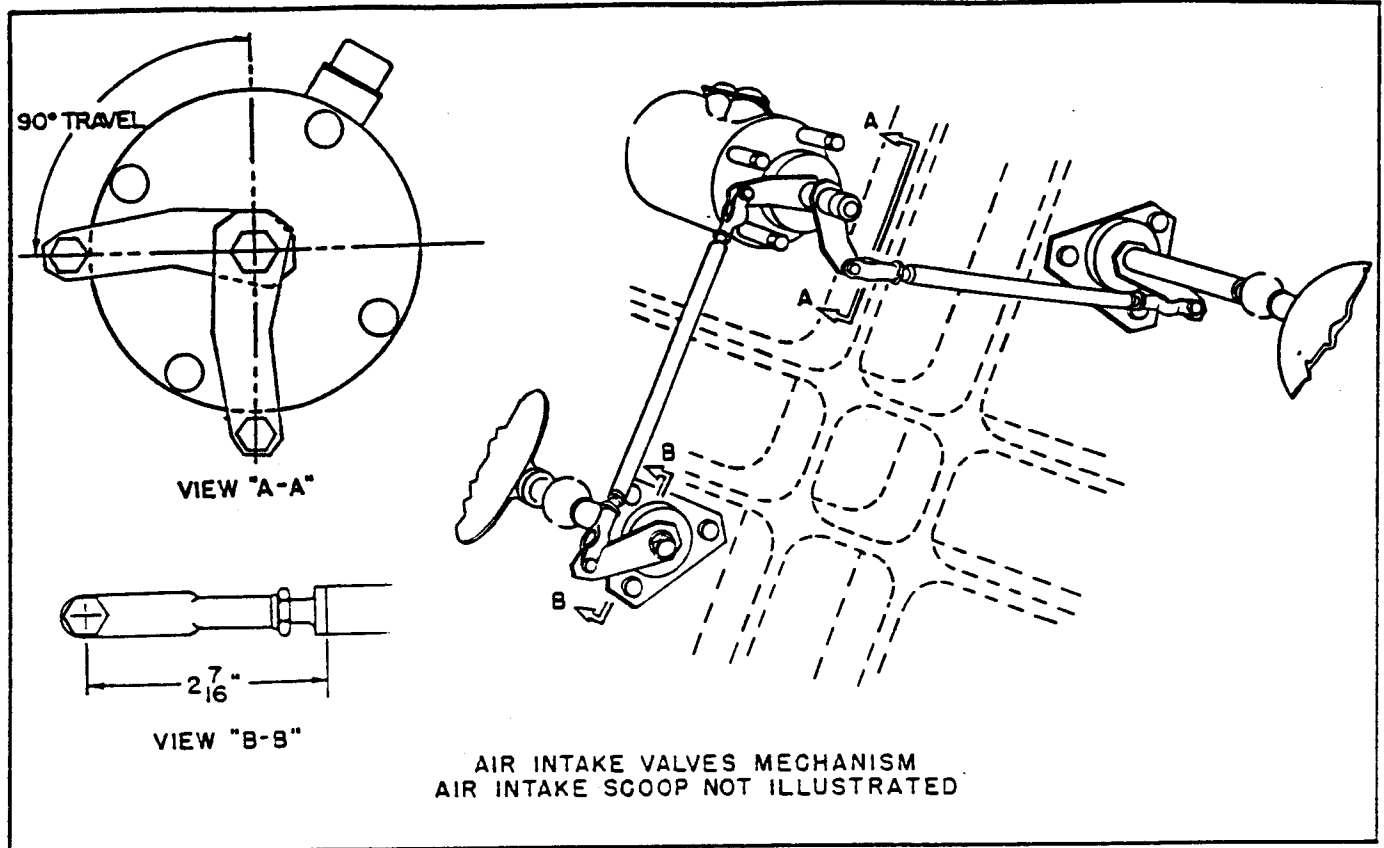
Turbosupercharger (Carburetor Air) Ram Air Intake Valve Mechanism
